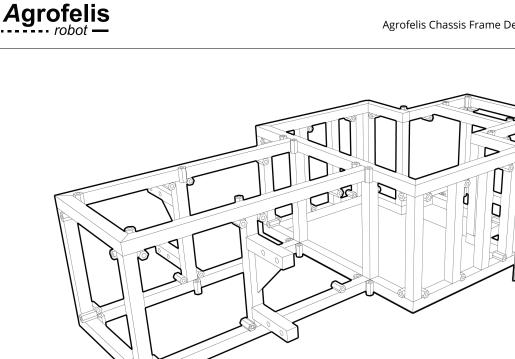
Manufacturing the frame step 7, Nuts forming multiple attach points
